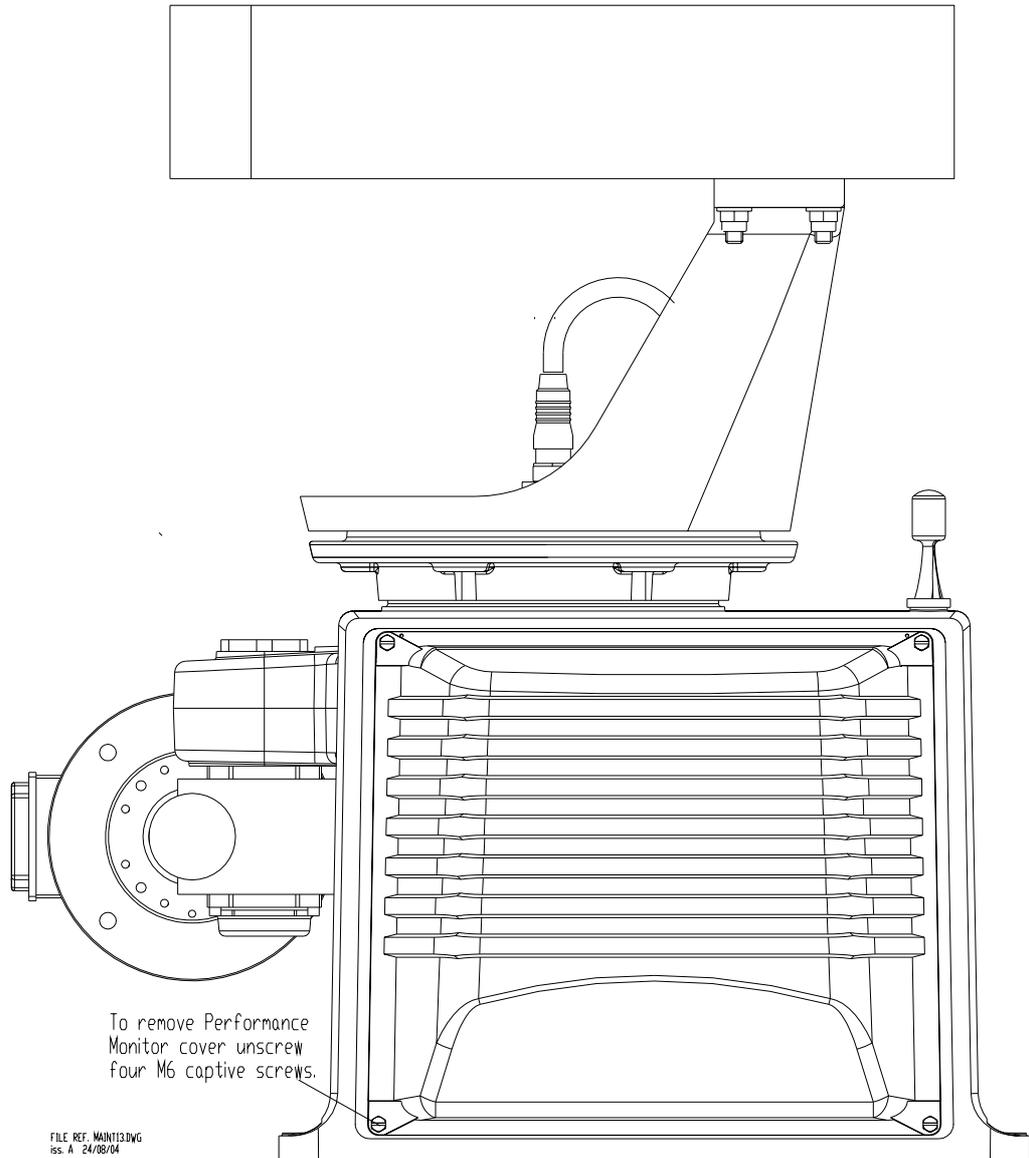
Access to Performance Monitor and Bearing and Heading Marker PCB
